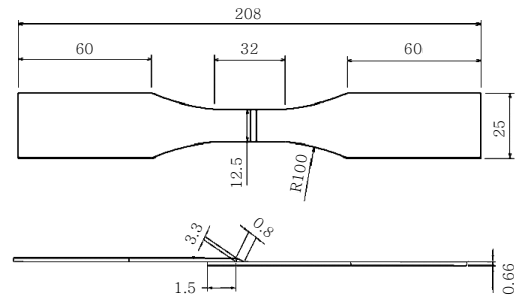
Configuration and dimensions of Lap weld specimen for fatigue test
